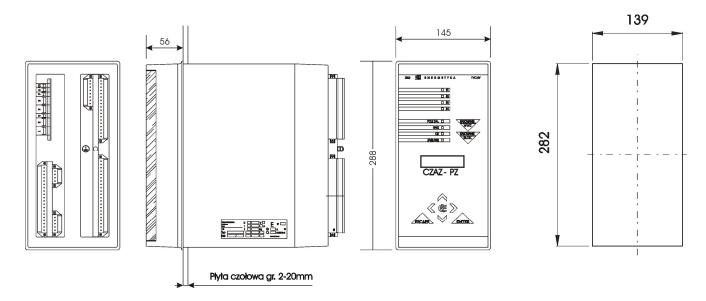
Front, rear and side view of flush-mounting case – dimension drawing Front panel 2 – 20 mm thick;
